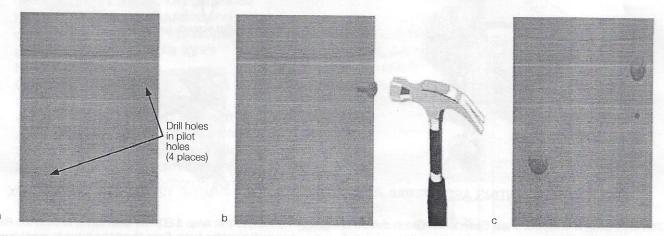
RIVETING THE ARM ASSEMBLY AND SOLAR PANEL ASSEMBLY
